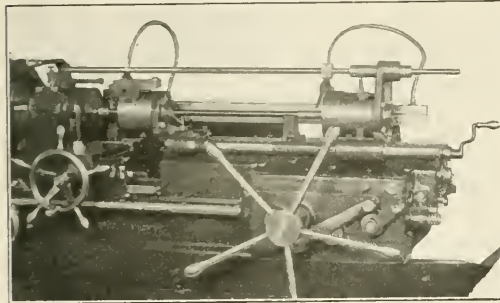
Model B Equipment for Turning and Threading Crown Stays
